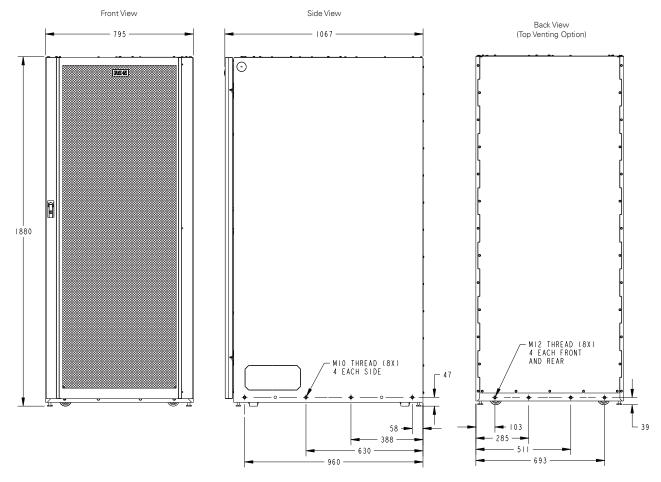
93PM IAC-PD Cabinet Dimensions (Front, Right Side, and Back Views)
